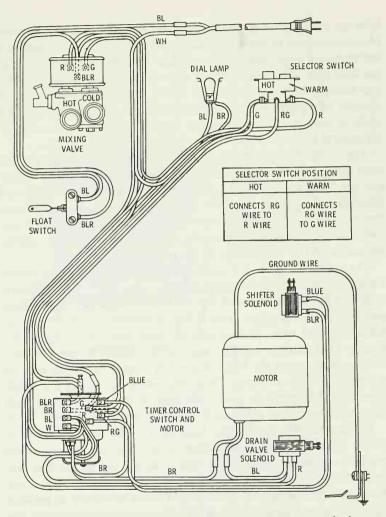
The wiring harness and electrical components of a cylinder-type washing machine.
